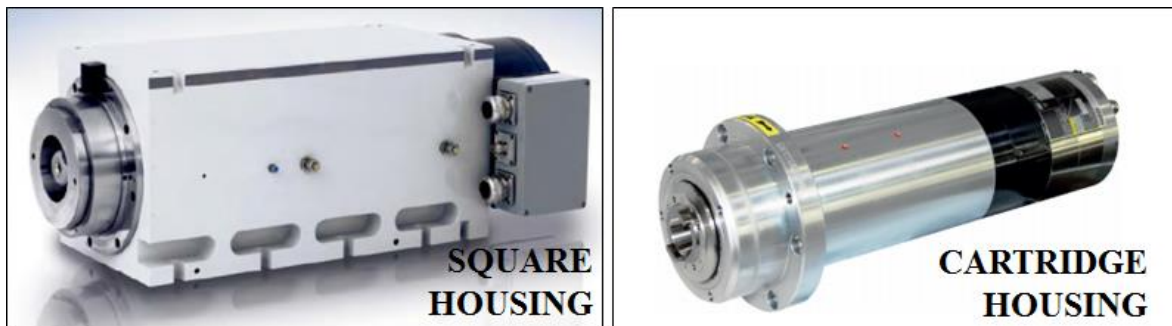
Common housing shapes for machine tool spindles [Courtesy: Spindeltechnik and HSD Mechatronics]
